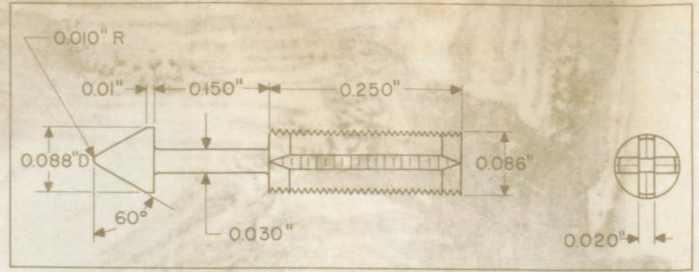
Distributor Pin Used in 40-lb-Thrust Concentric-Tube Injector
